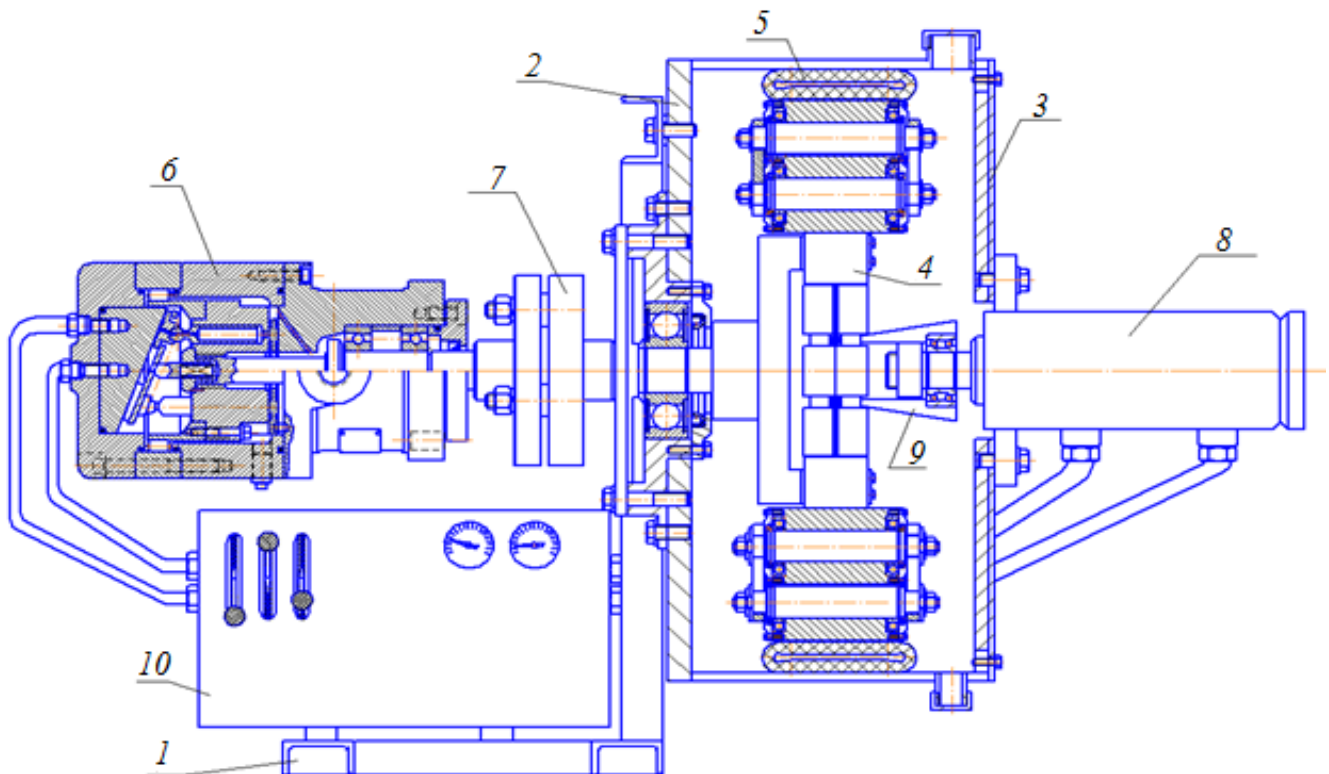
Scheme of a non-piston universal hose concrete pump of a new design with a hydraulic drive
